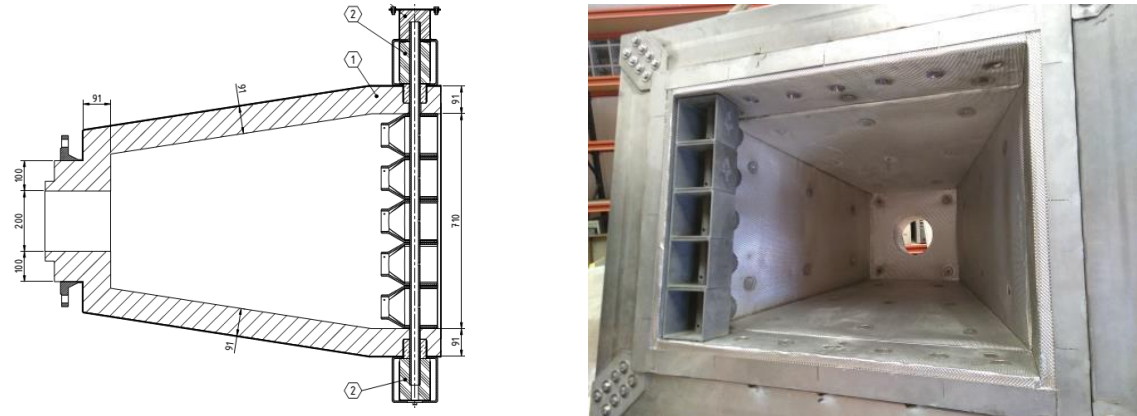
CAPTURE receiver prototype drawing (left) and partly assembled prototype (right) with only one column of absorber modules
